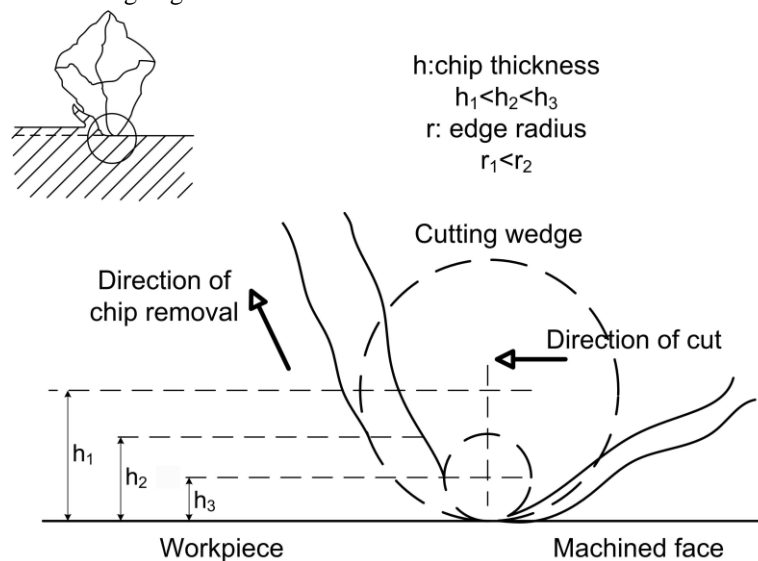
The View of Chip Geometry at a Cutting Edge [2]
